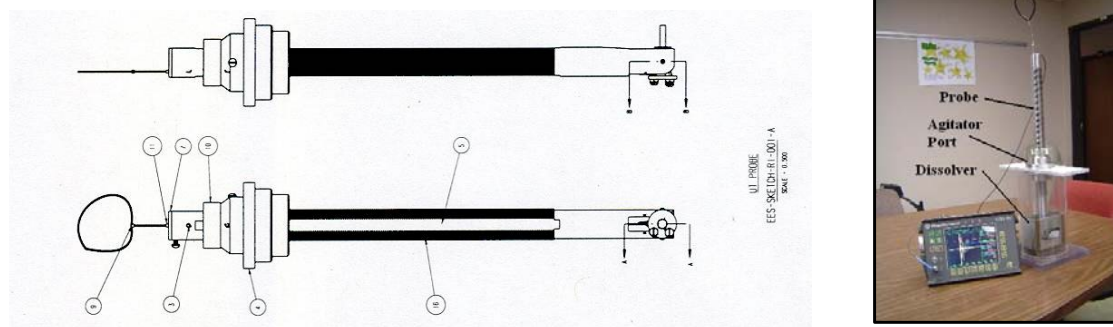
Drawing of Manipulator Tool and UT Probe and Mock Set Up
